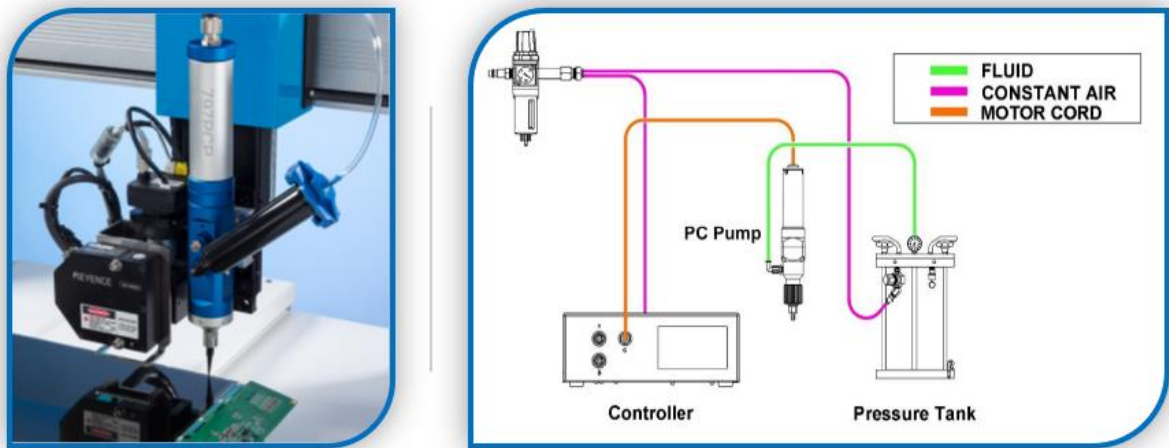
Progressive cavity pump and injector head (left) [68], Schematic of a complete dispensing system (right) [69]. Blue border: dedicated to L-F module assembly.
